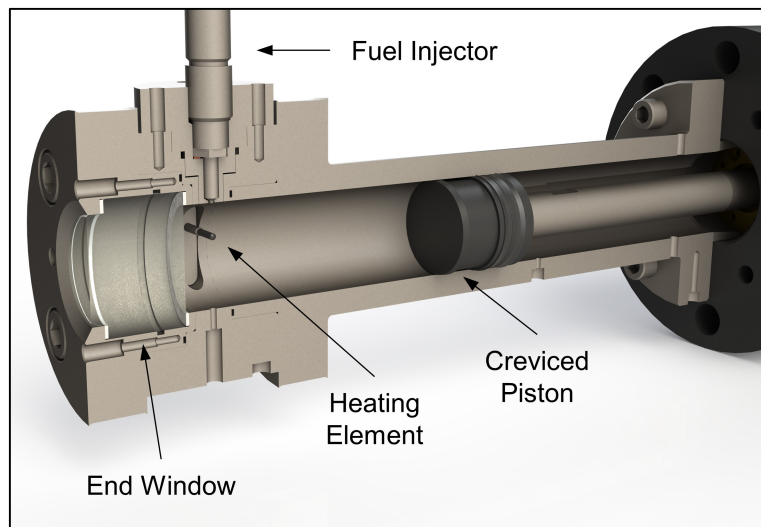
RCM cutaway depicting combustion cylinder, optical head, injector, and hot surface device
